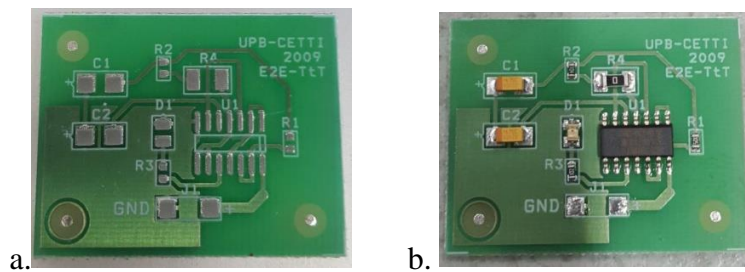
1. *Exemple of a. PCB and b. Assembly PCB
